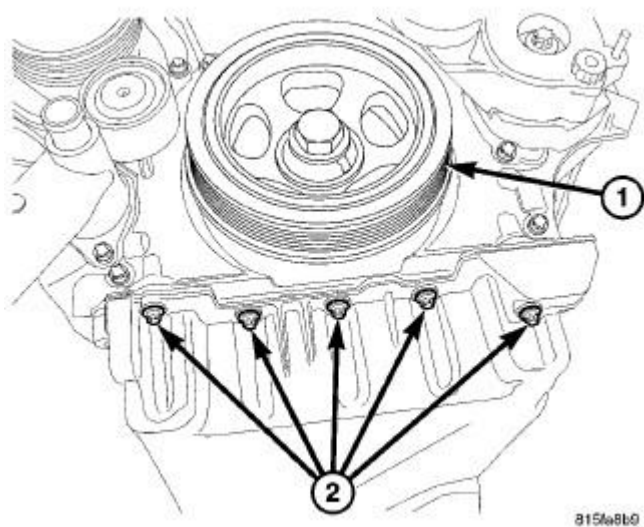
VIBRATION DAMPER & FRONT OIL PAN BOLTS
